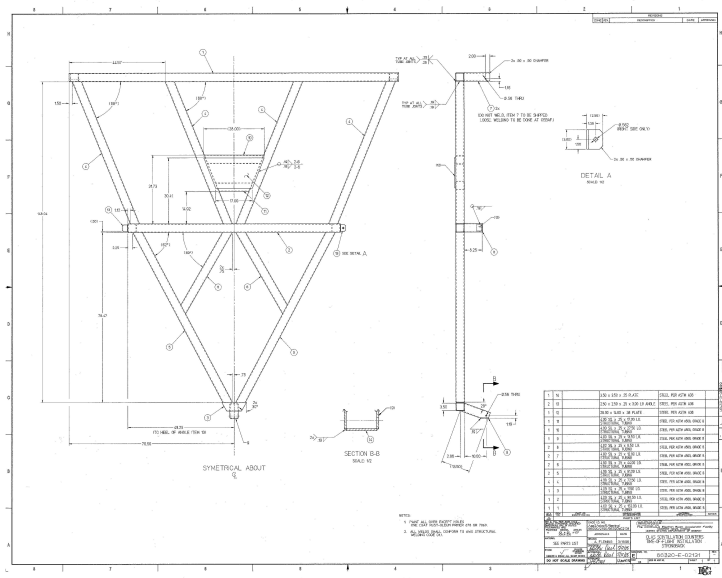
Engineering drawing of the FTOF strong-back assembly.
